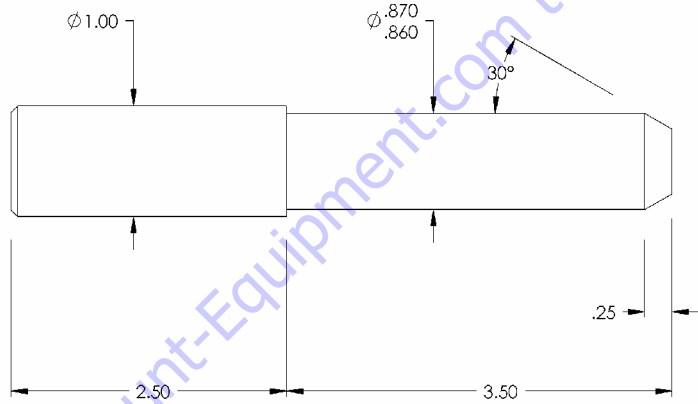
Drift Pin for Lining Up Thrustwashers with Output Planet Gear
